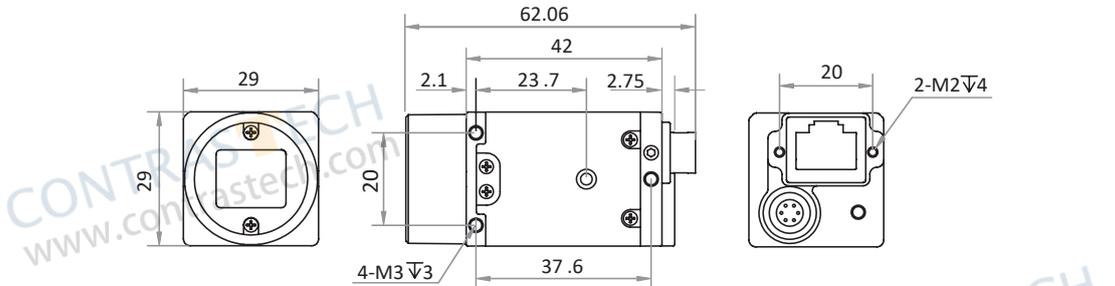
Mechanical Dimensions of the C-mount GigE Cameras with 29\*29\*42mm housing (The installation uses M3 screws).
